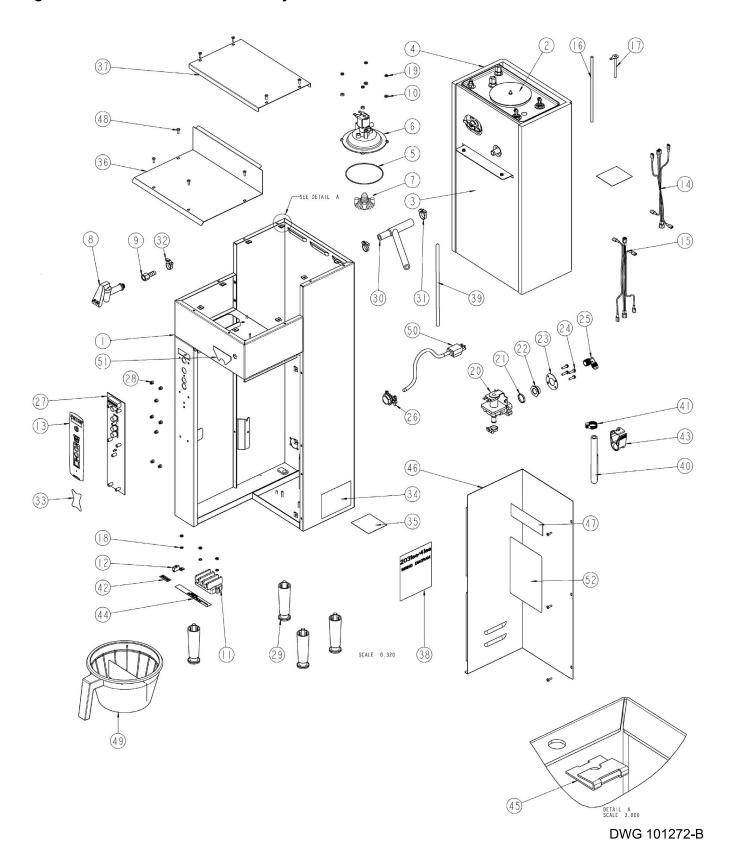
CBS-2032ee Tank Assembly, Part # 104095
